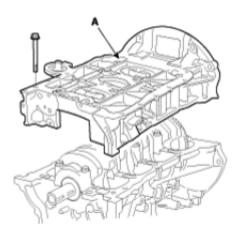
Identifying Ladder Frame Courtesy of HYUNDAI MOTOR CO.
